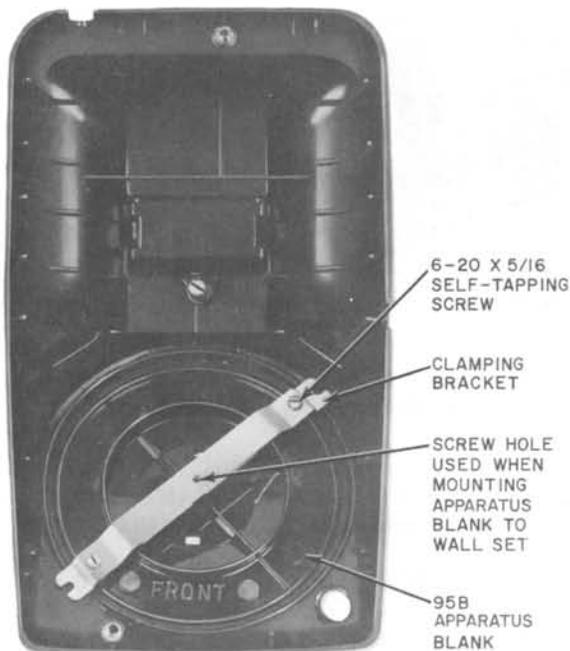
95B(MD) Apparatus Blank Mounted in Desk-Type Telephone Set
